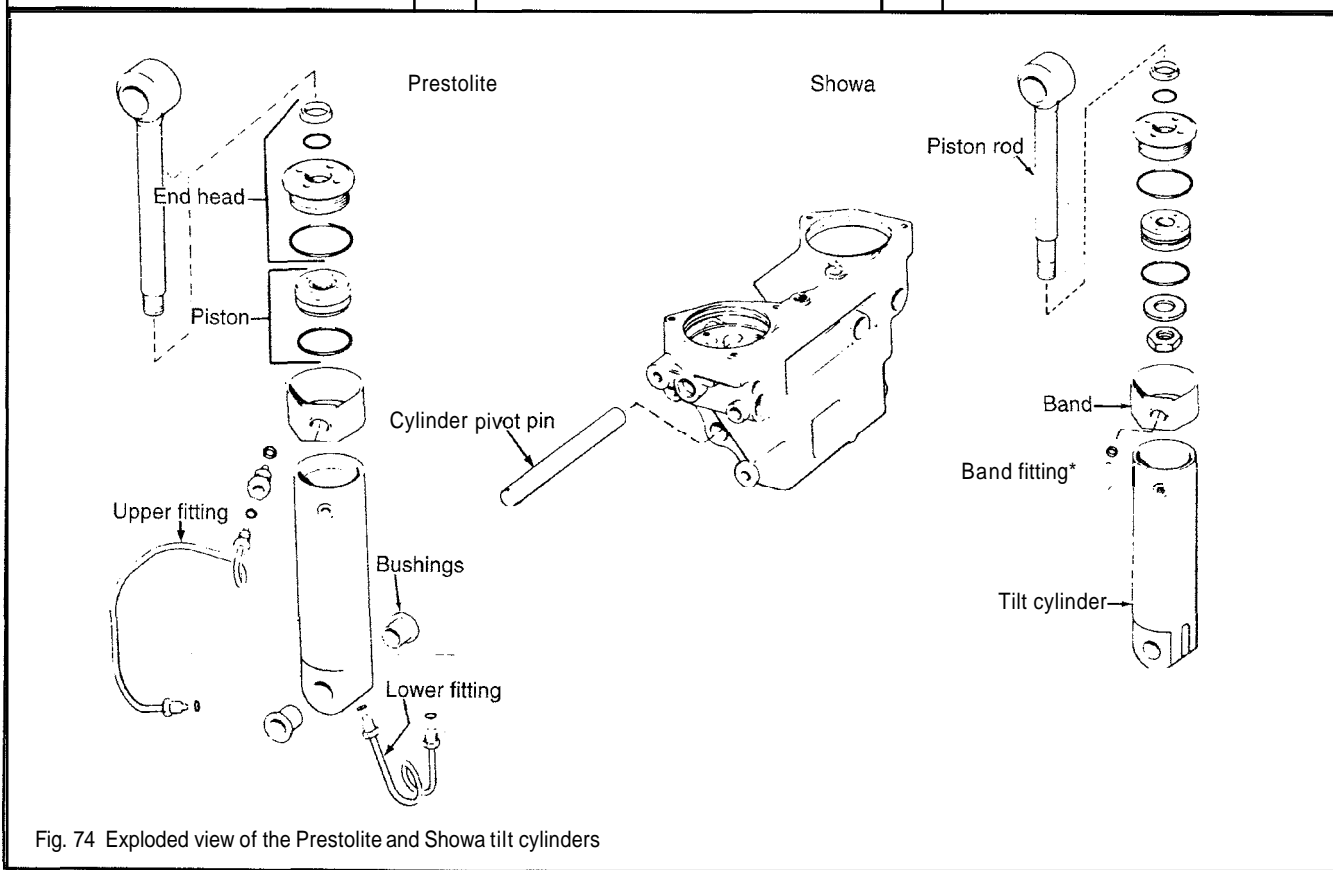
Exploded view of the Prestolite and Showa tilt cylinders
